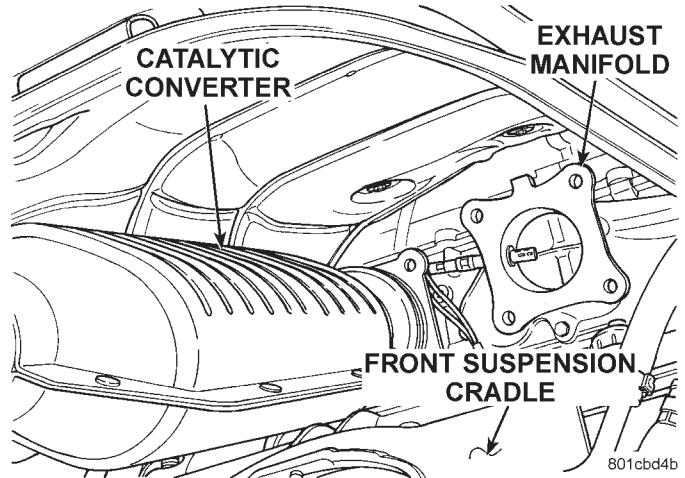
Exhaust Positioned For Removing Power Steering Pump
